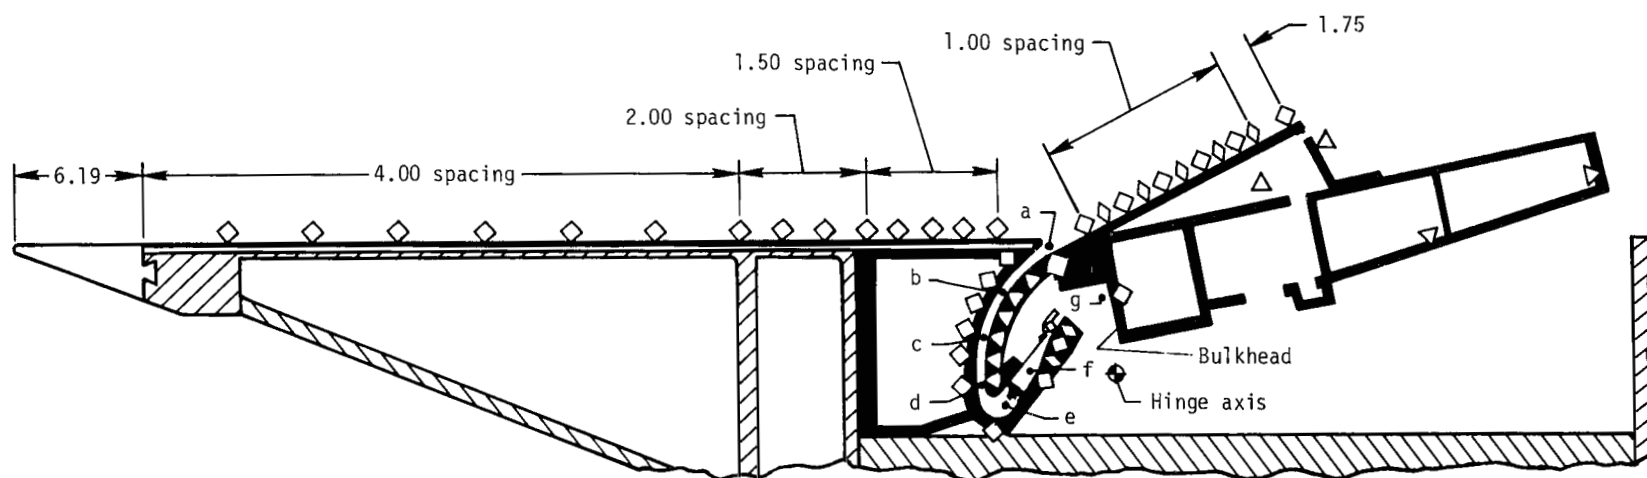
Seal and rub surface arrangement. Dimensions are in inches.
